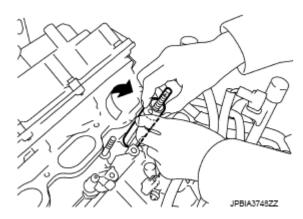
Identifying Hook Pawl Portion Of Injector Remover Courtesy of NISSAN MOTOR CO., U.S.A.
